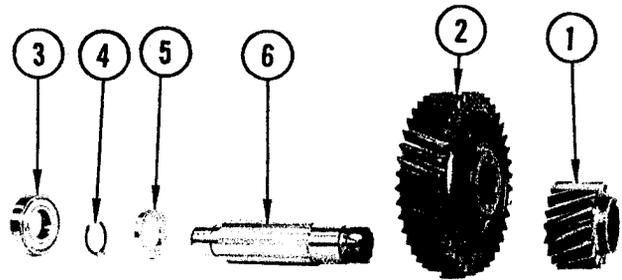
EXPLODED VIEW OF UPPER CREEPER GEAR ASSEMBLY
